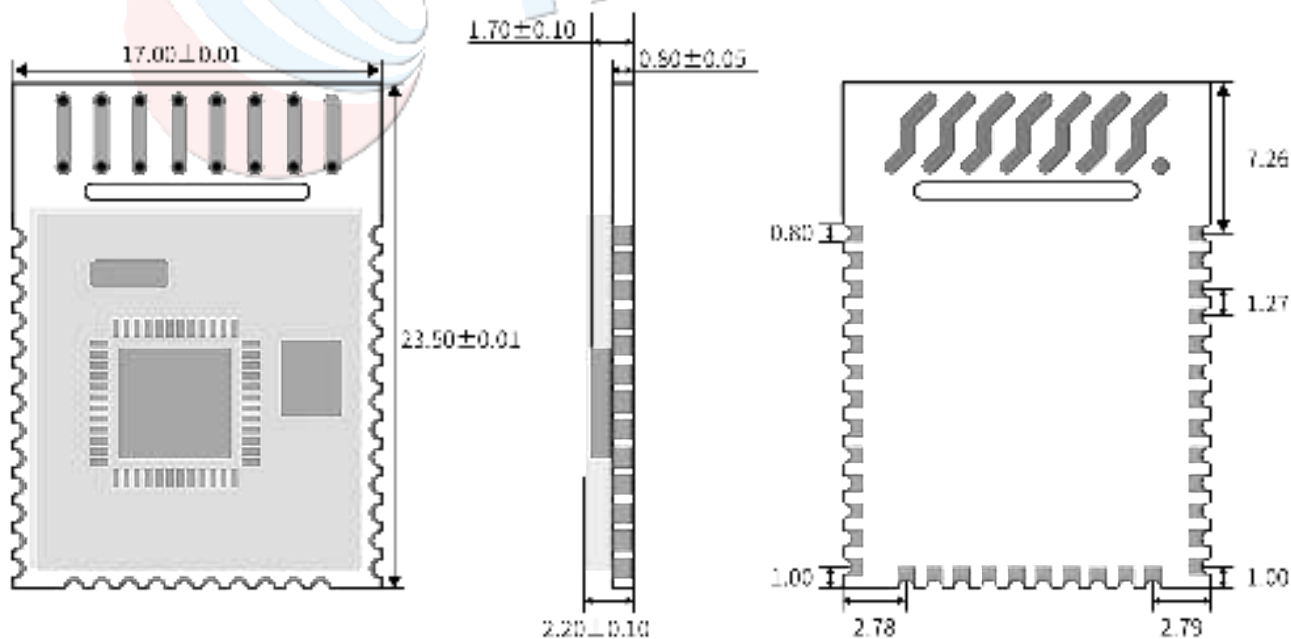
Recommended PCB Footprint of RF-BM-2642B1
